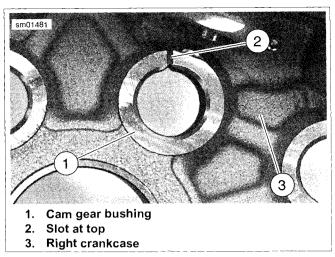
Cam Gear Bushing Installed in Crankcase
